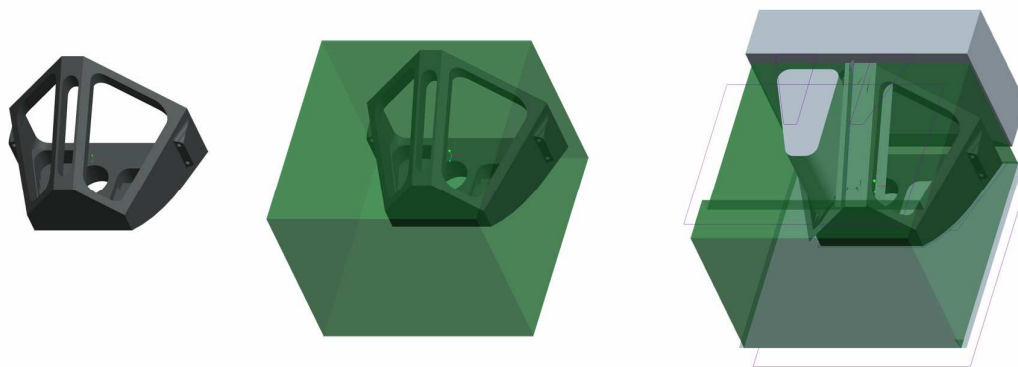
PART, WORK-PIECE, MANUFACTURING MODEL
